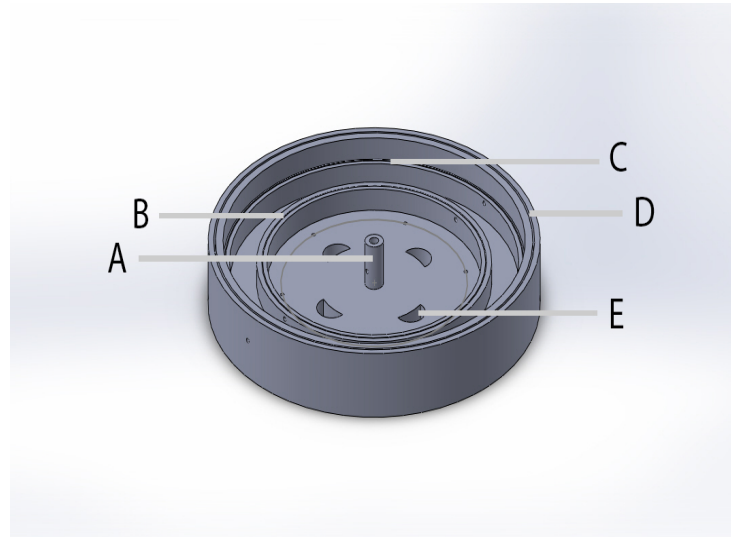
Schematic of th bottom flange teflon supporting structure. In this image it is possible to see the anode support (A), the shielding grid support (B), the collecting grid support (C), the CsI photocathode support (D) and holes to help the gas flow inside the detector (E).
